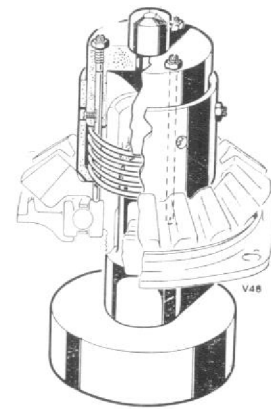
Press block T.74929 and three-pin adapter, T.78599 for removing ball bearing from top vertical drive gear.
